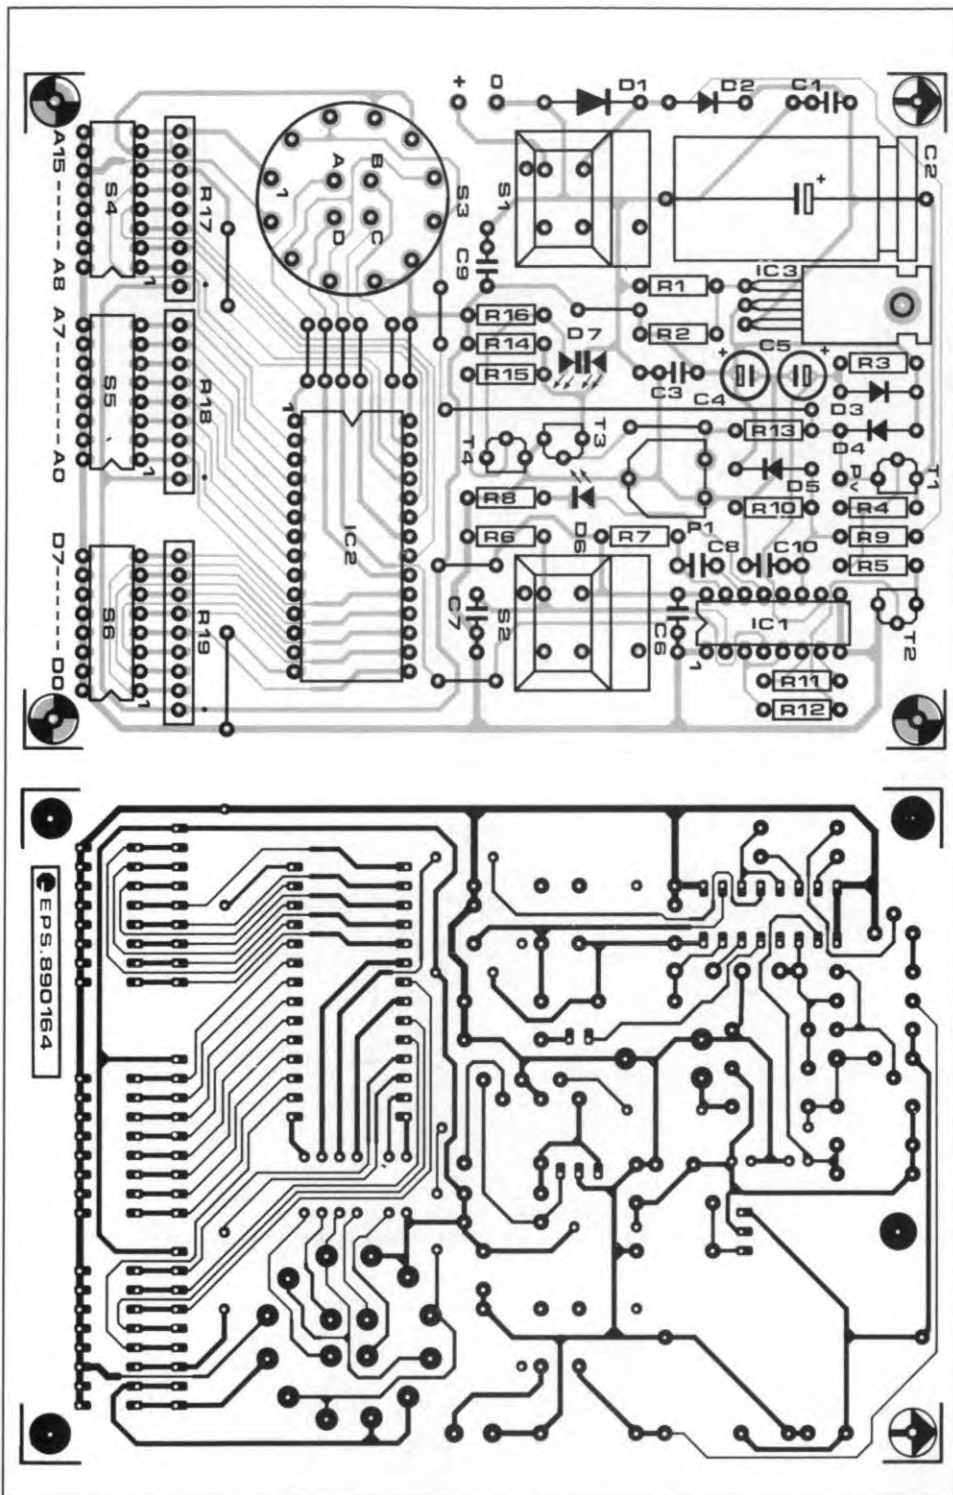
Track layout and component mounting plan of the single-sided PCB for the mini EPROM programmer. Start the construction with fitting the wire links.
